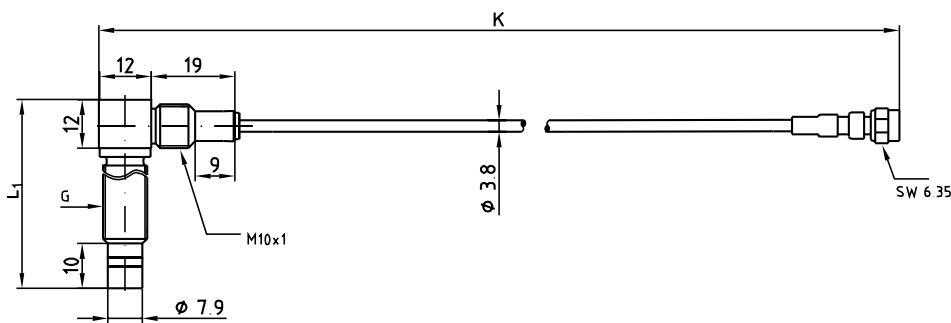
Displacement sensor DS-1054 with right-angled head; fig. without cable protection
